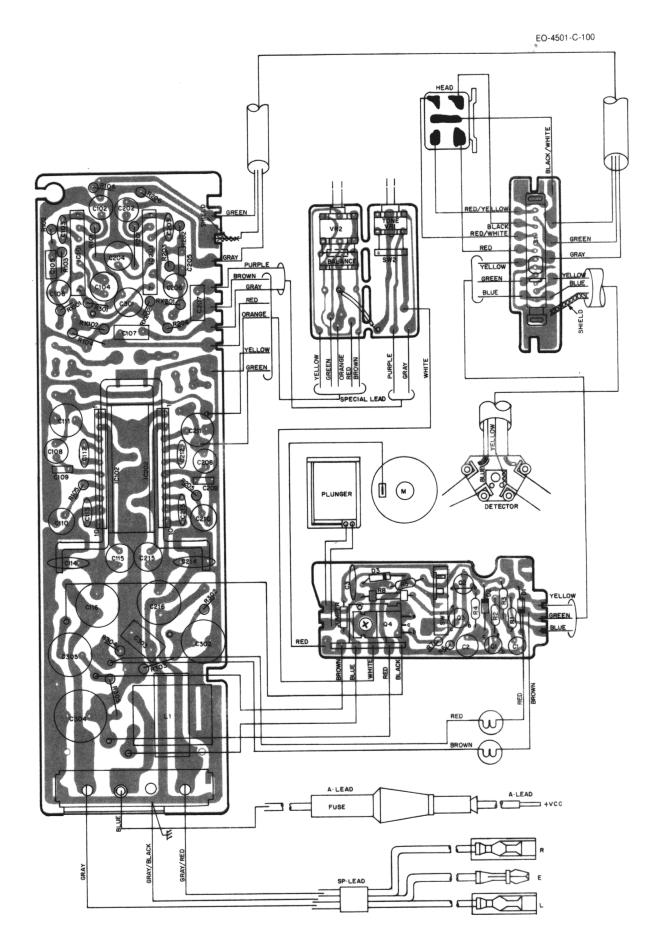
Component Outline and P.C. Board Wiring Model 450I
